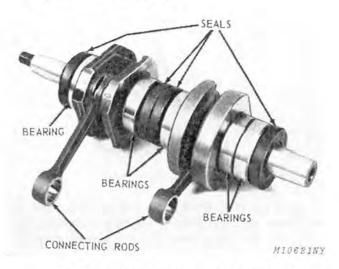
Inspecting Crankshaft and Connecting Rod
